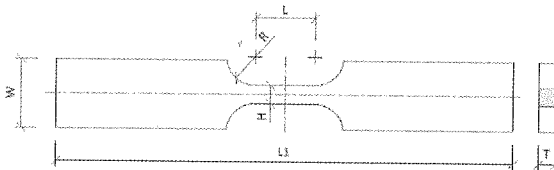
Geometry of the specimen used in the fatigue tests [2]
